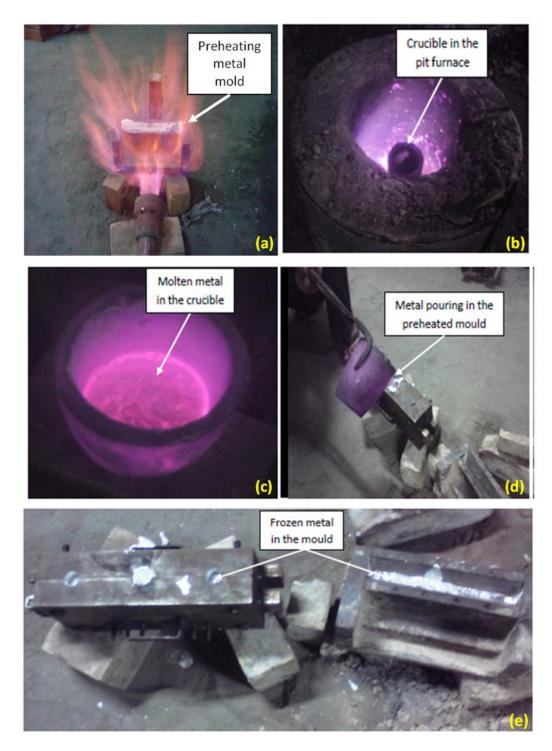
Preparation of Zn-Ni Solder alloys (Casting Route)
